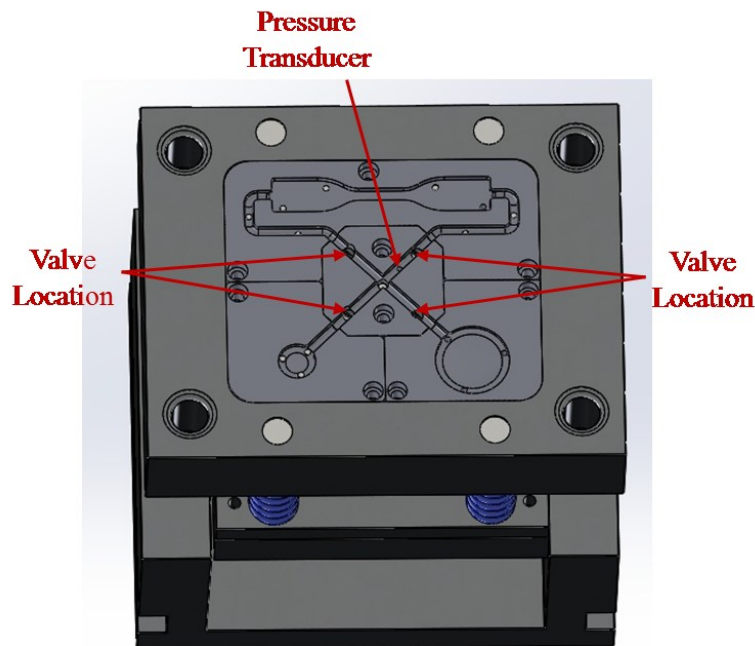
Modular Mold Assembly (4-Valve configuration)
